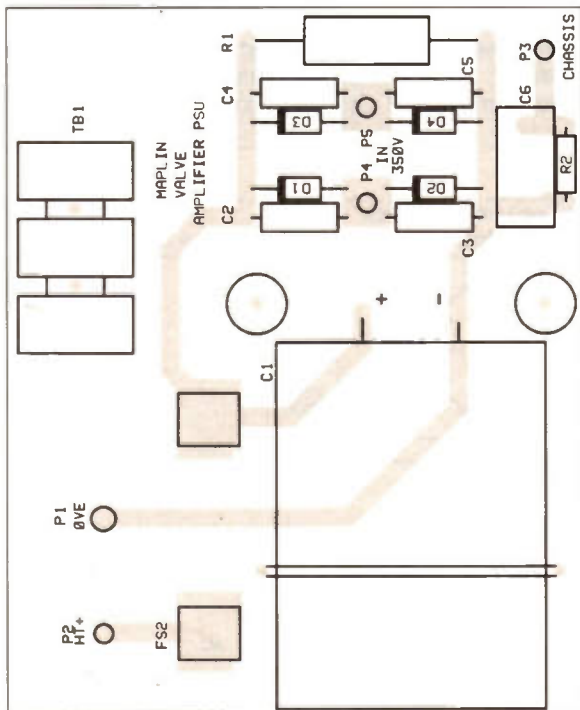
PCB legend and track. Important Note: for safety reasons the ready-made PCB must be used, since this has a solder resist. PCB track is shown here for information only.
